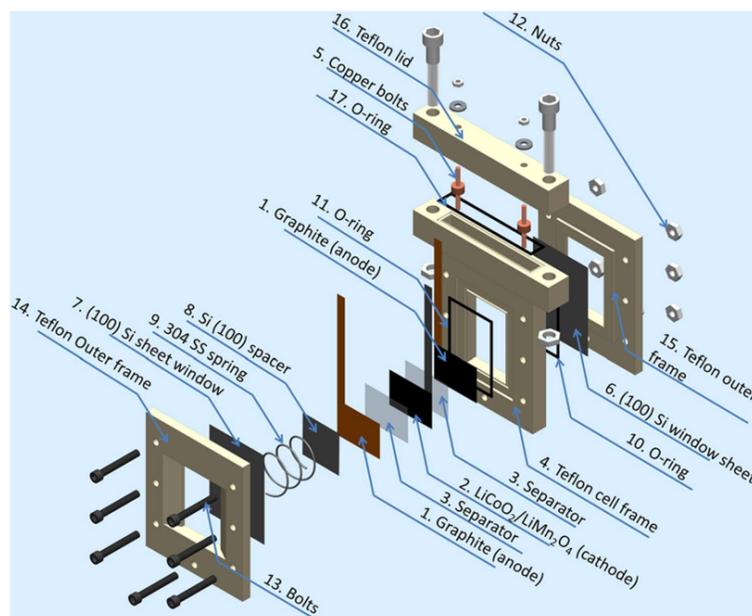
Exploded view of the in-situ electrochemical cell showing various components.
